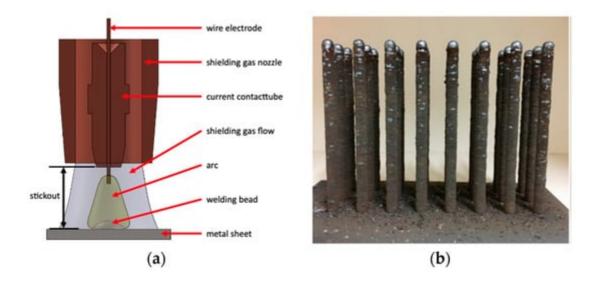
Steel printing concept of generating steel rebars automatically while printing the concrete: (a) gas-metal arc welding system and (b) printed steel [55].
